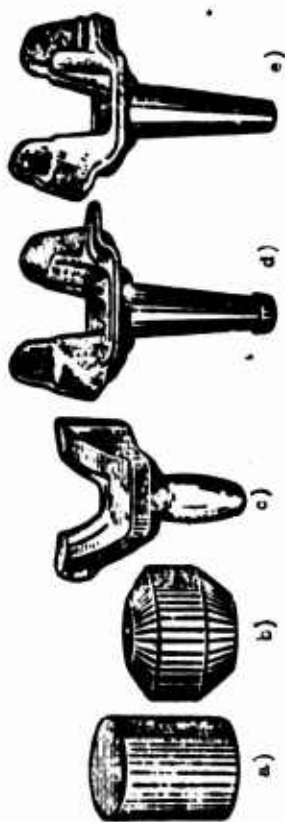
Transitions of manufacture of forging of the rotating cam by combined extrusion [20]: a) blank; b) upsetting and beginning of obtaining of shank pressing by extrusion; c) stamping in a preliminary pass; d) final stamping; e) cutting of the burr (on a cutting press).
